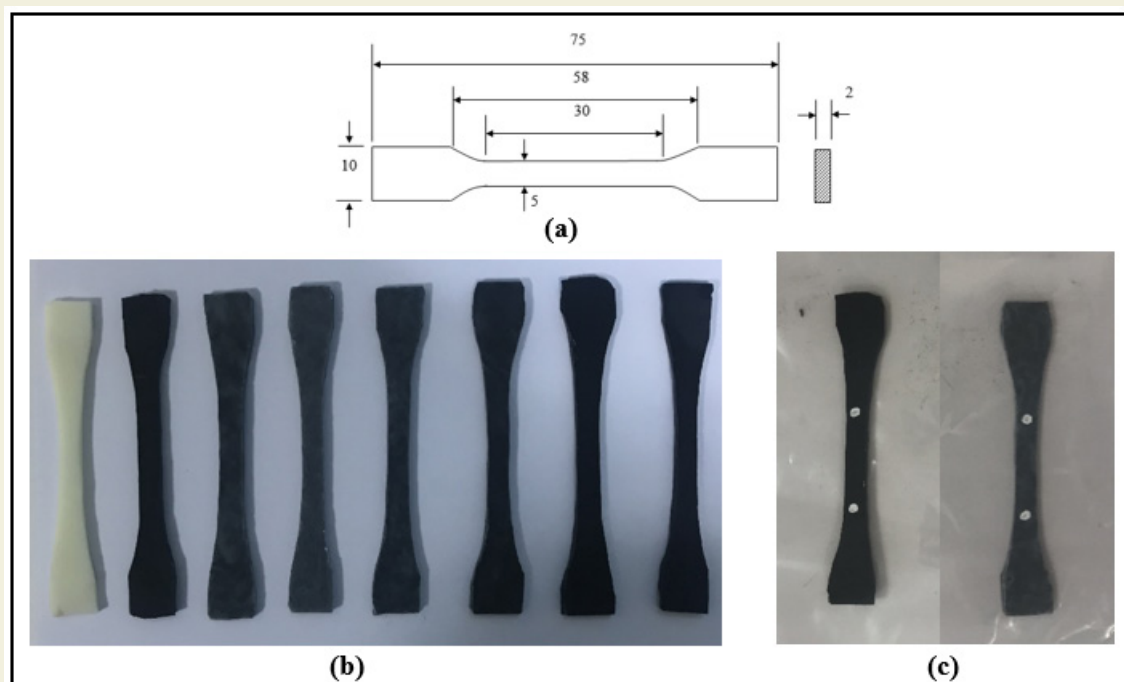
a) Standard bulk sample sizes, b) produced bulk sample samples, c) gauge length marking on the sample.
